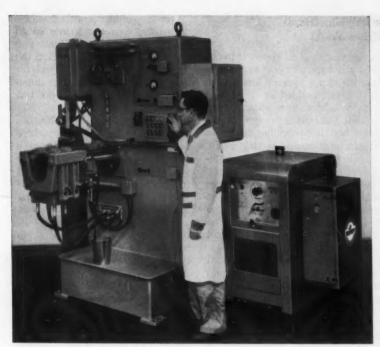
Automatic longitudinal seam welder equipped to weld coffee-maker bodies announced by Expert Welding Machine Co.
